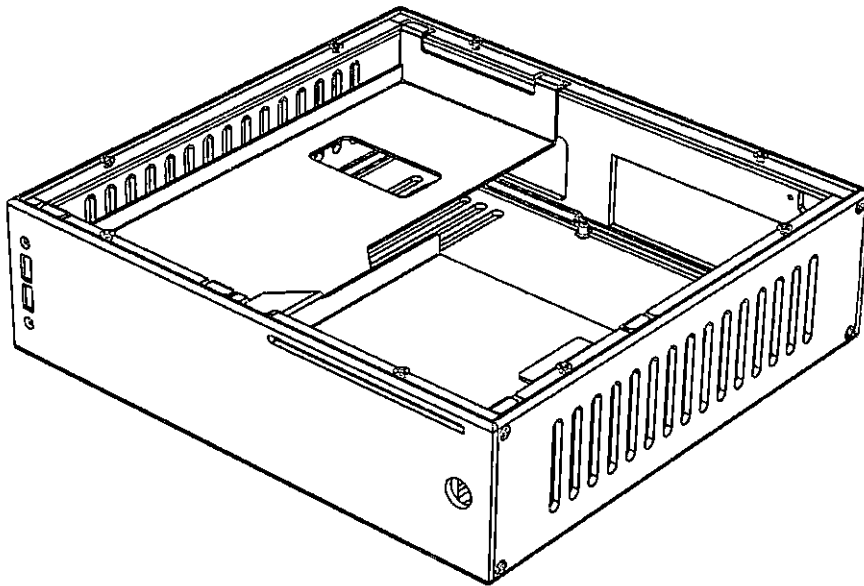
With the top cover removed the drive brackets are visible. Curt Adkins.
